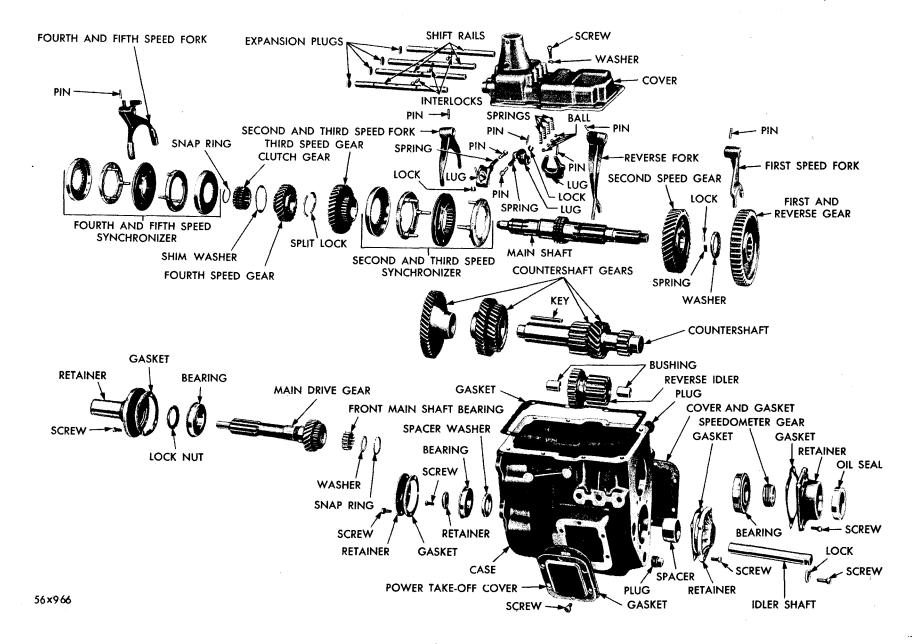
5-Speed Transmission Model 540 (Exploded View)
